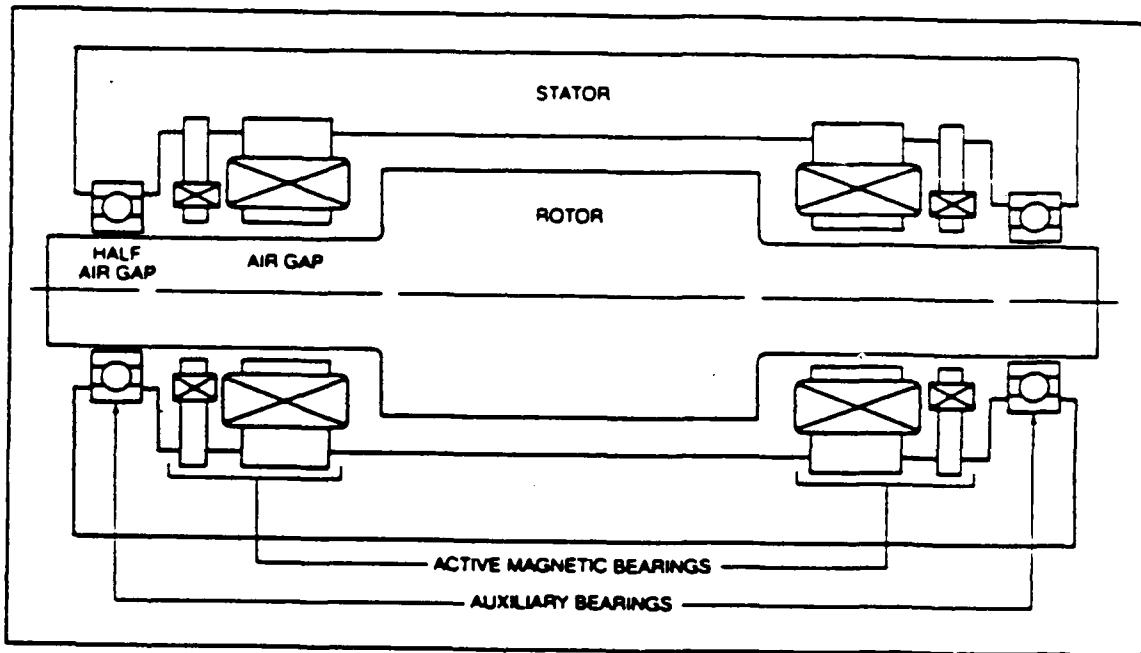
Basic arrangement of auxiliary bearings in machine with magnetic bearings. [8]
